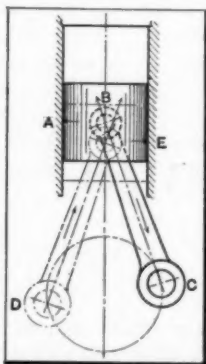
Diagram showing how noise is produced by an ill-fitting piston
